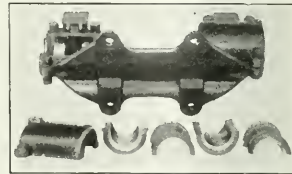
DETAILS OF BACK-GEAR BRACKET
